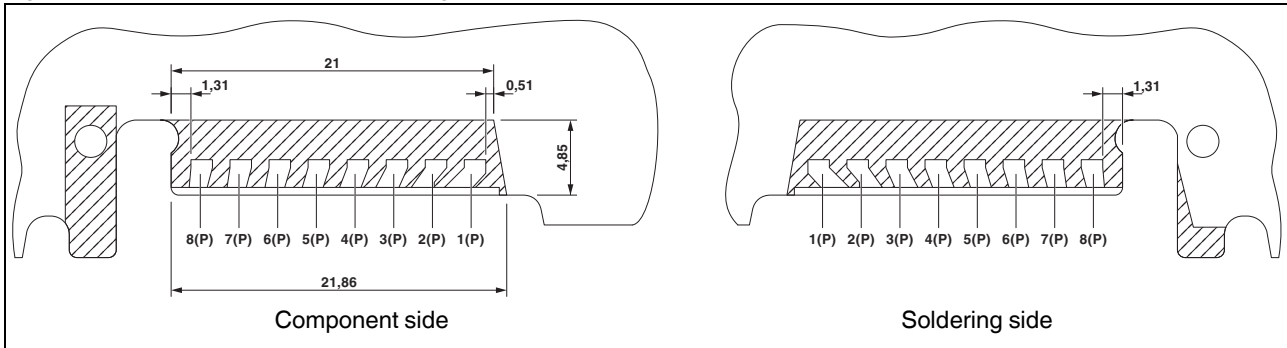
Detailed dimensional drawing of TBUS8-...-PPPPPPPS contact pads
